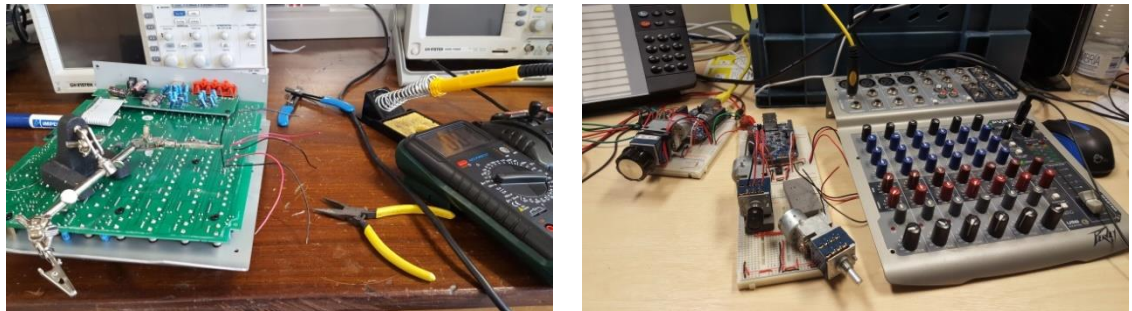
Soldering motorised potentiometers to the mixing board EQ knobs.
